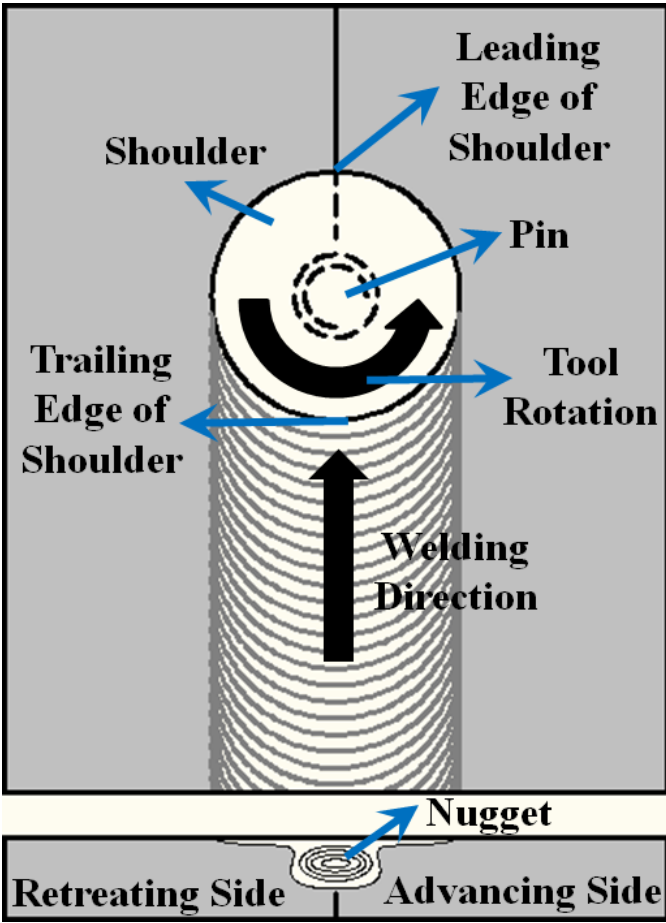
Schematic drawing of Friction Stir Welding.
